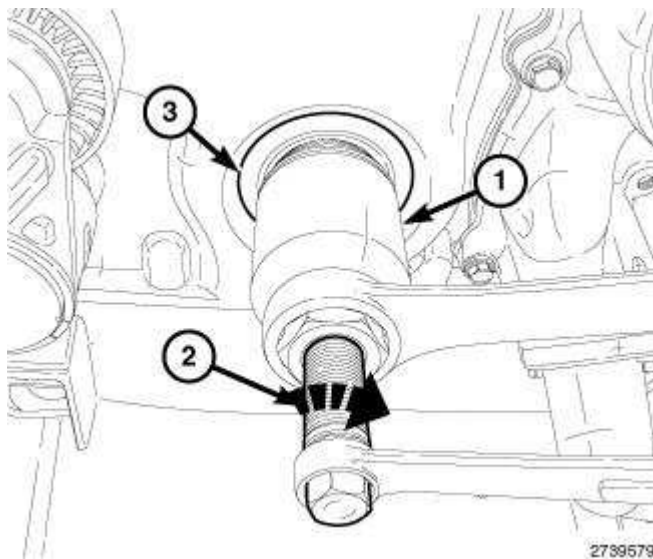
Extractor Screw, Seal Remover & Front Crankshaft Oil Seal
